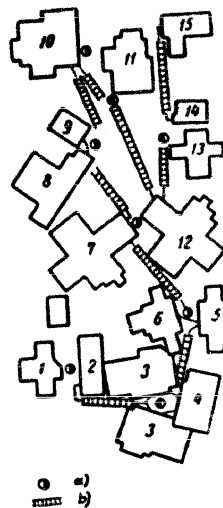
Arrangement of Machine Tools in Production Line Shortening the Travel of the Parts of the Operation
